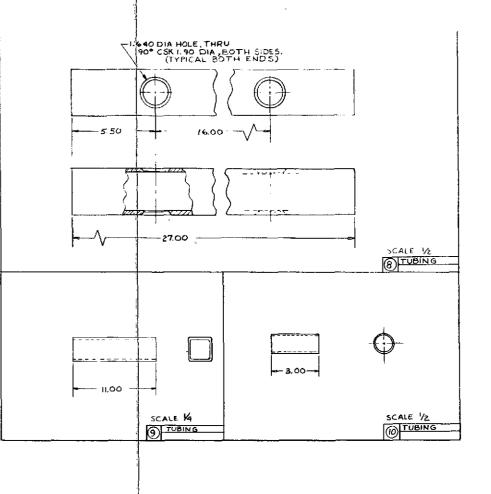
Frame, weldment, vacuum tank support
